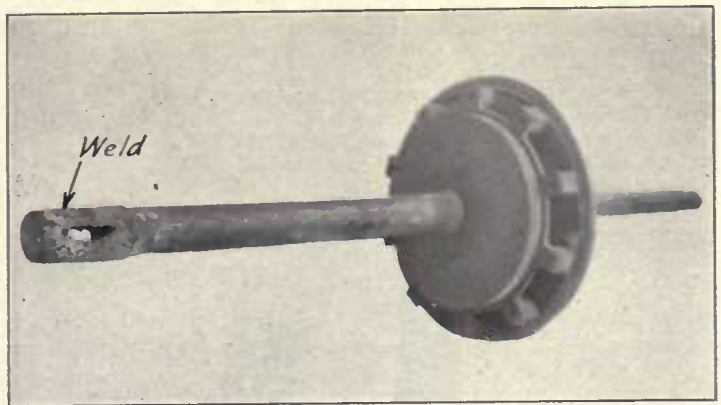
Piston Rod Showing Metal Welded on End.
